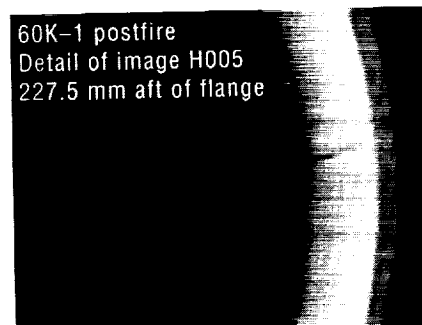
This is a cross-sectional image of a Fastrac 60K nozzle taken in the forward chamber of the nozzle, showing a crack in the liner material.
